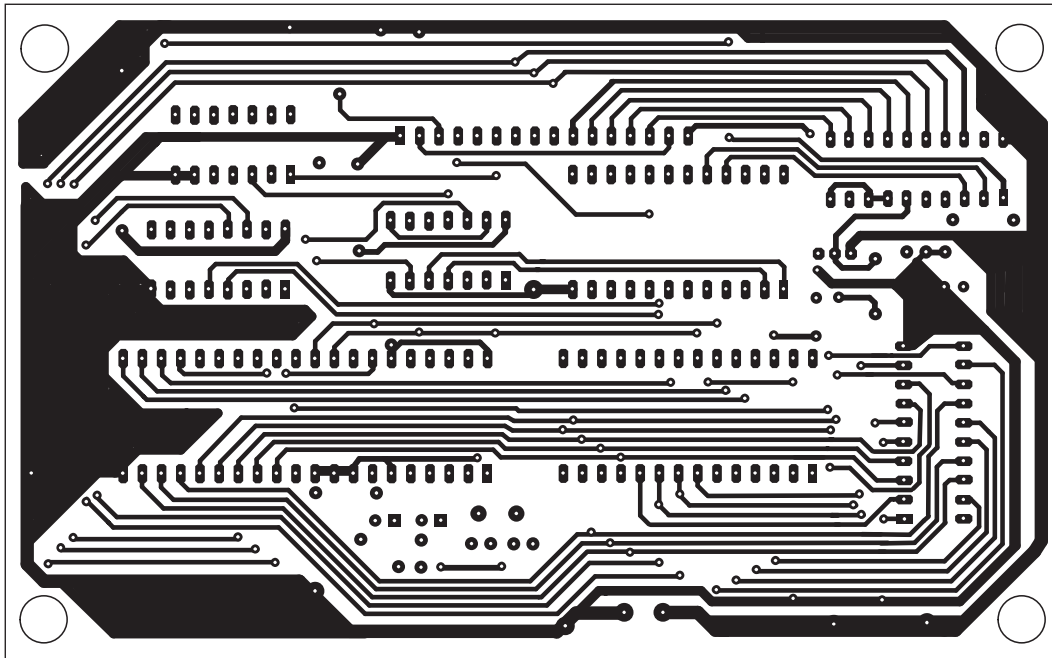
Actual-size, solder-side track PCB layout of the microprocessor-controlled thermometer
